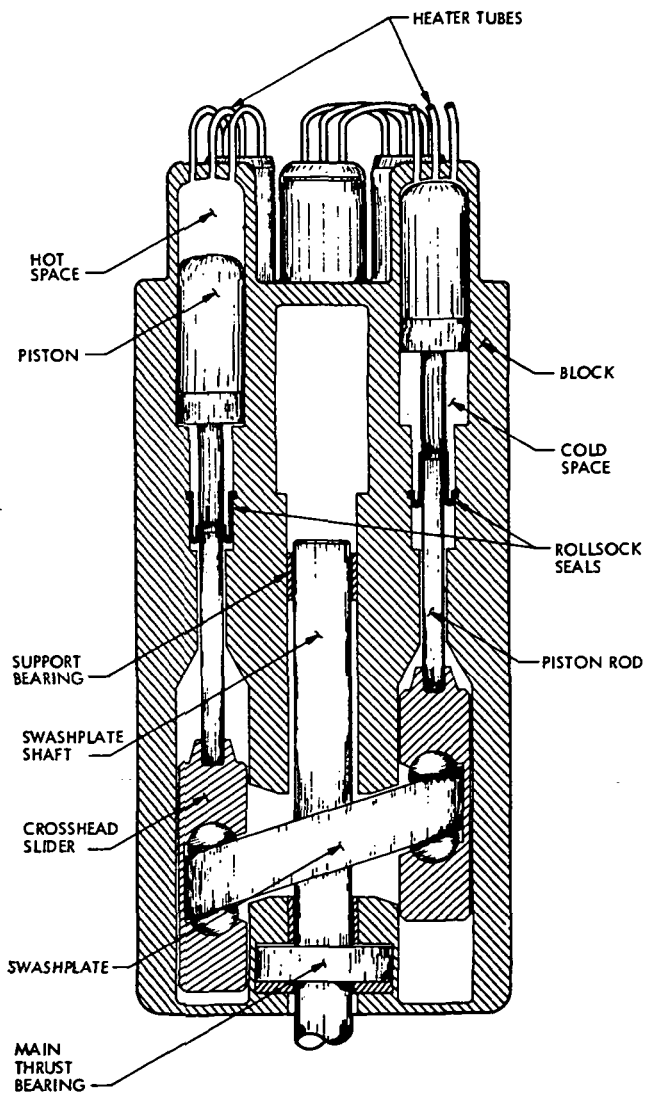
Double-acting Philips/Rinia engine with swashplate drive (Ref. 6-13)
